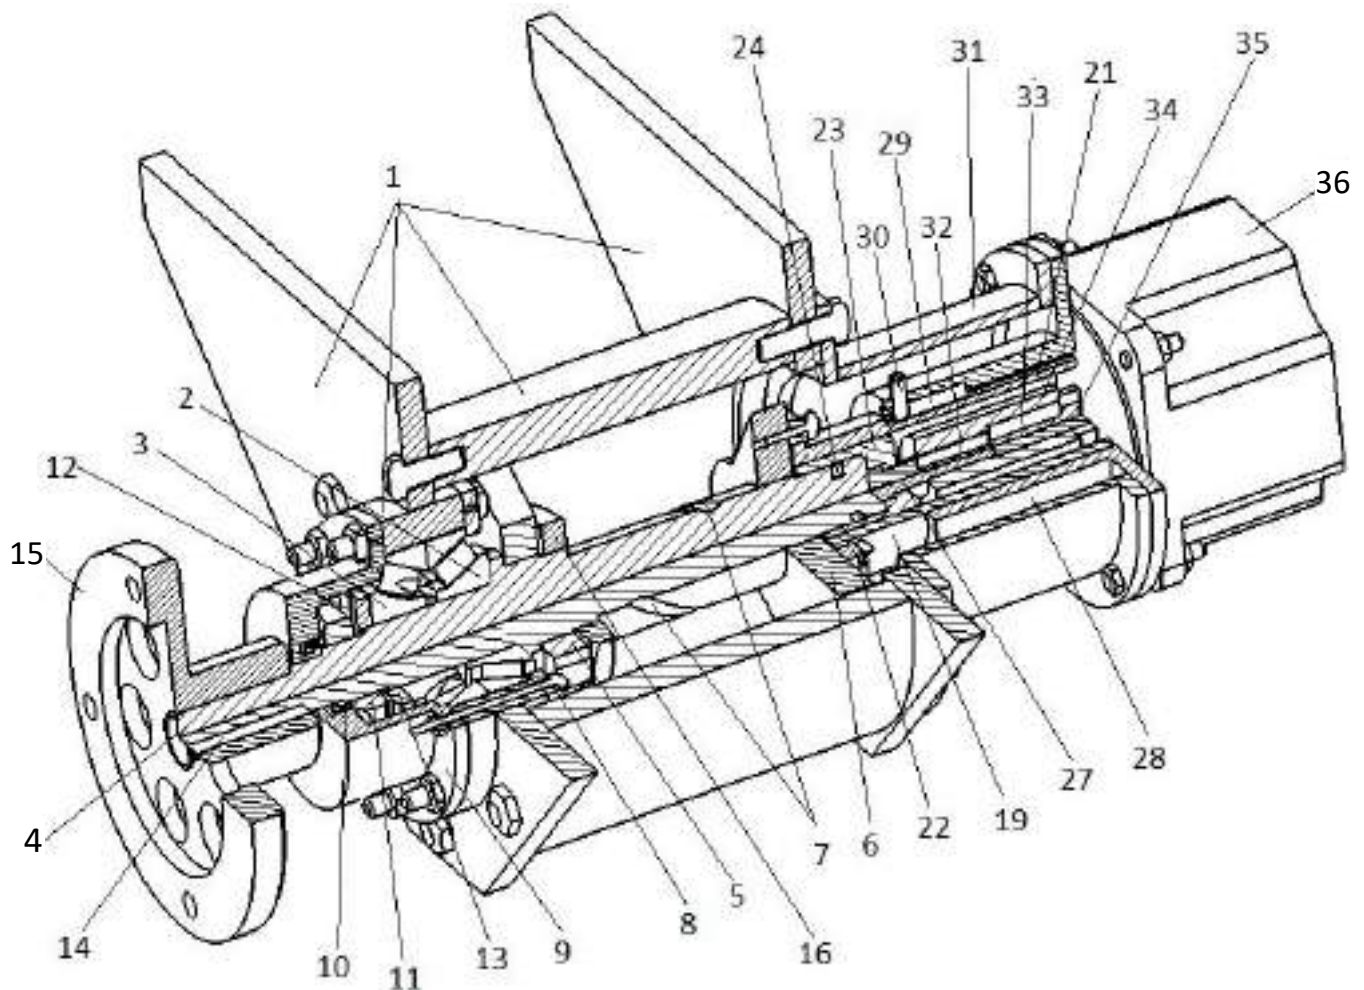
General view of the proposed adjustable electromechanical vibration drive
